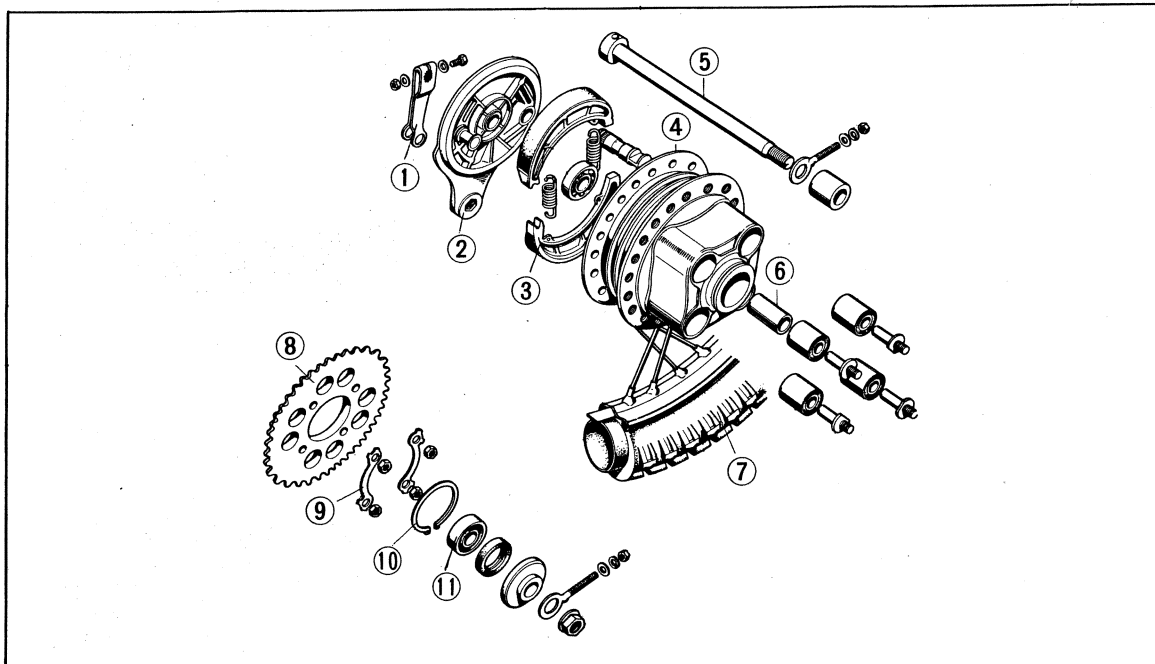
① Rear brake arm ② Rear brake panel ③ Brake shoe ④ Rear wheel hub ⑤ Rear wheel axle ⑥ Rear axle distance collar ⑦ Rear wheel tire ⑧ Final driven sprocket ⑨ 8 mm tongued washer ⑩ 58 mm circlip ⑪ 6302R ball bearing
